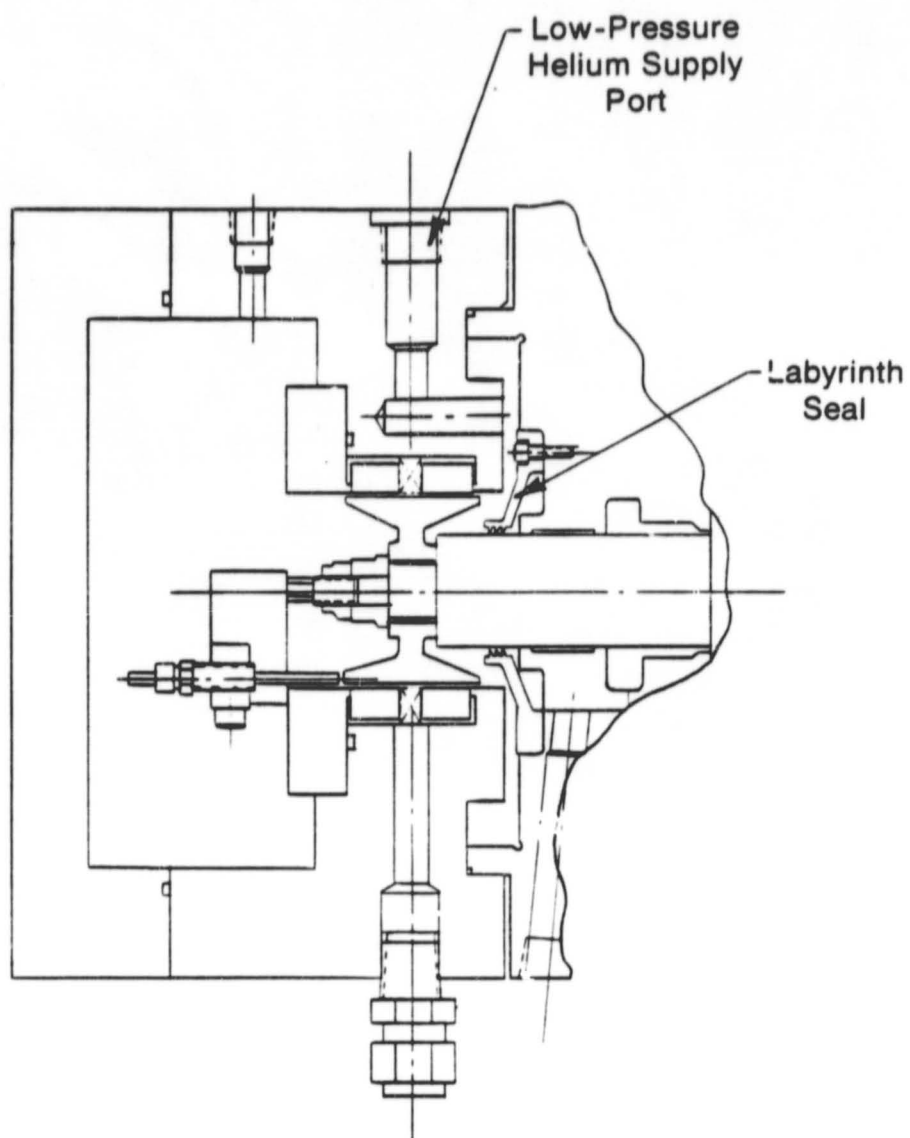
Modified Test Rig Configuration - Seal Set No. 4
